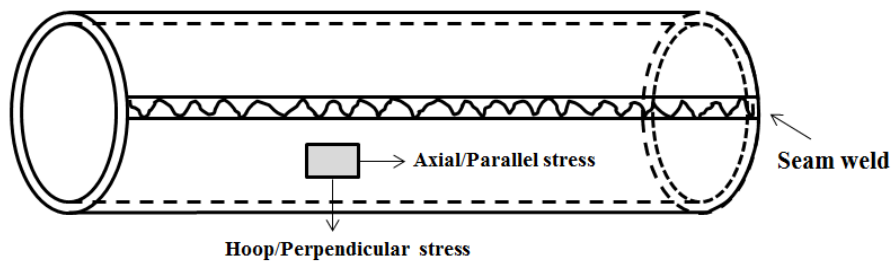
Typical pipe seam weld and stress identification
